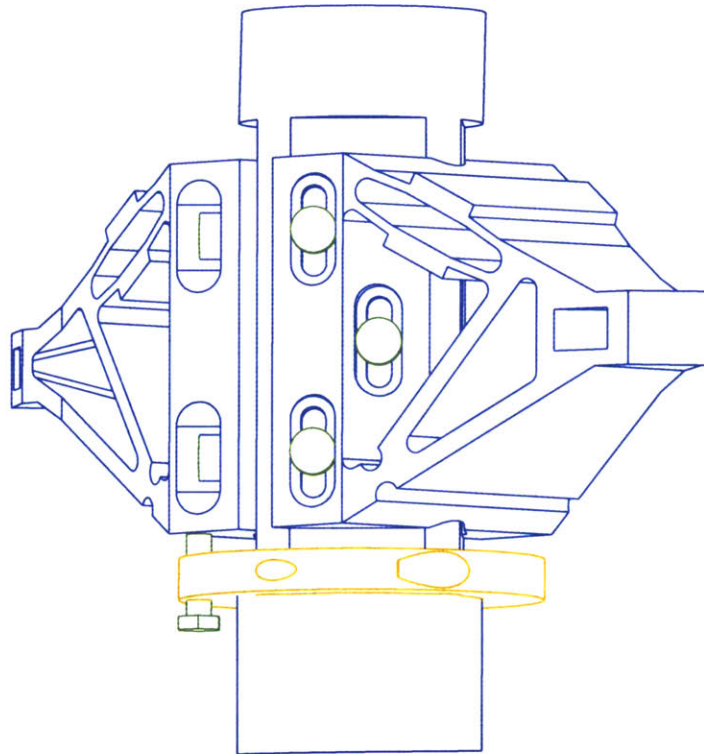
Side view of the proposed rotary fast tool servo shaft, toolarms, and coarse height adjustment collar.
